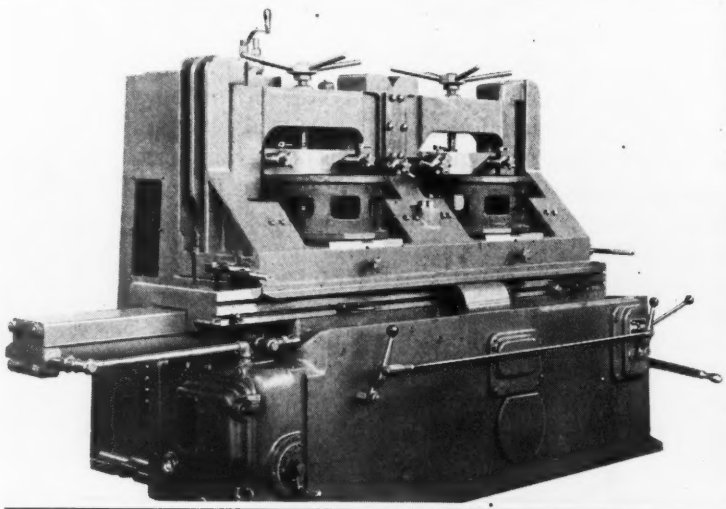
Milling the Feet of Motor Frames with Equipment that Handles Nine Sizes
